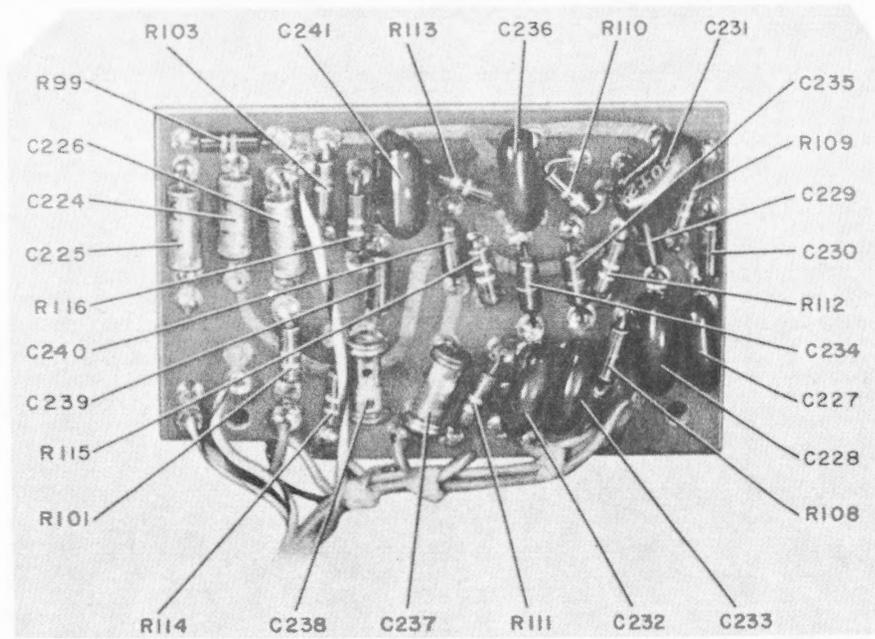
Signal Data Translator CV-1377/PRC-47 (A3), Card Assembly E43, Parts Location
